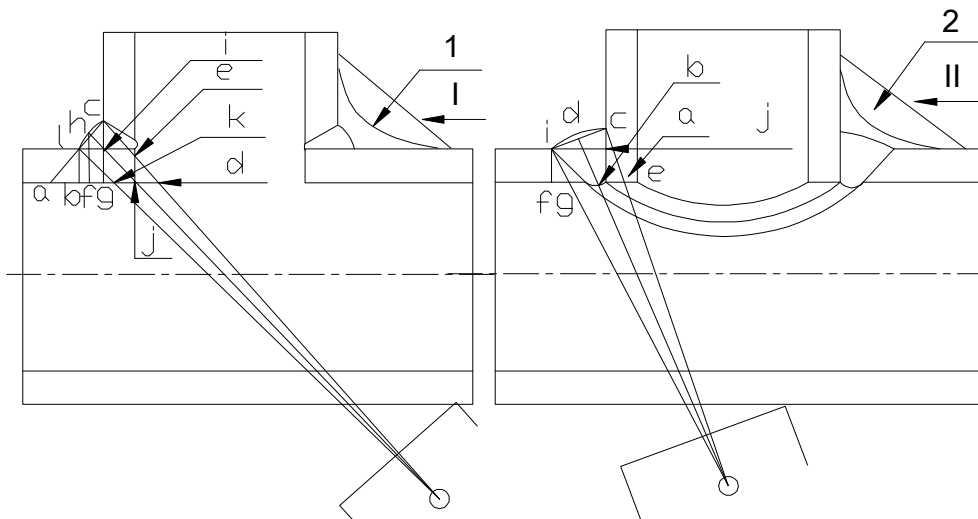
irradiate the type of rode、 type of inserted uprightness intersection pipe welds as the sketch
